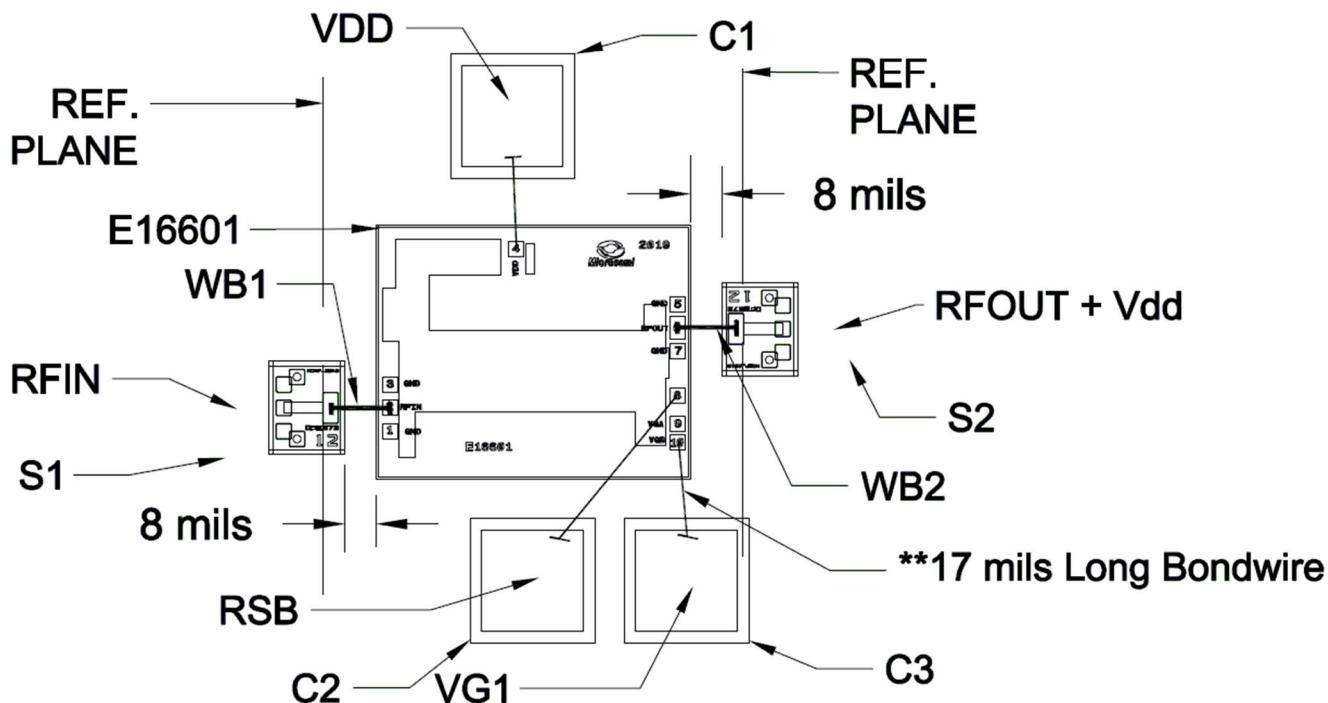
Test Circuits 2-26 GHz: Assembly Drawing
